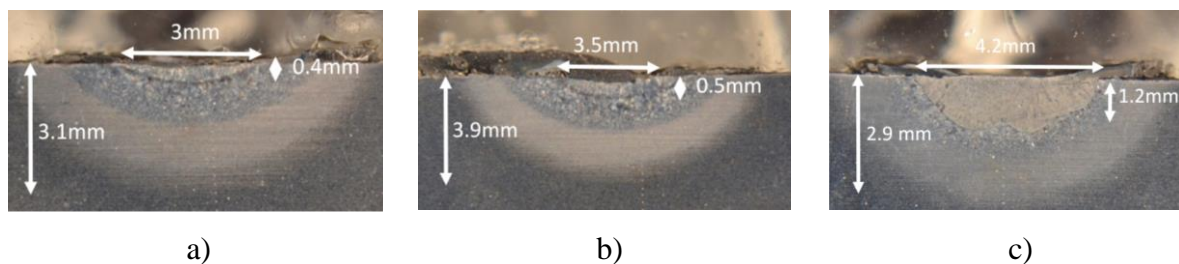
Dimensions of fusion zone for samples welded at 1.0 mm/s using argon as shielding gas a)  $E = 450$  J/mm, b)  $E = 500$  J/mm, and c)  $E = 600$  J/mm
